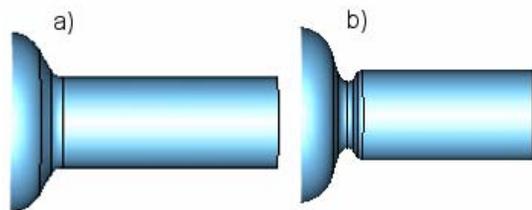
Transition from the cavity to a larger beam pipe for a TESLA type cavity.
